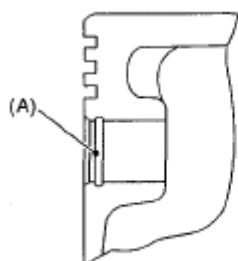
Checking Clearance Between Piston Pin And Hole In Piston
